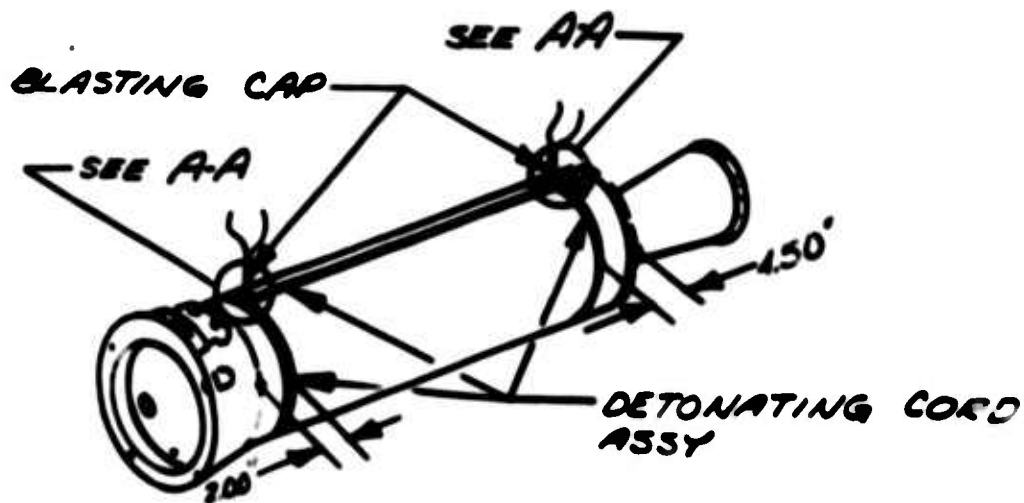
A SKETCH SHOWING THE POSITION OF THE DETONATING CORD ASSEMBLY FOR TEST 2.
